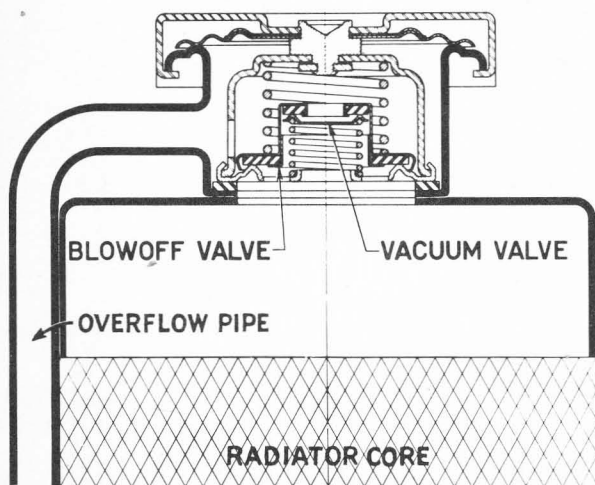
Pressure Type Radiator Filler Cap Installation
